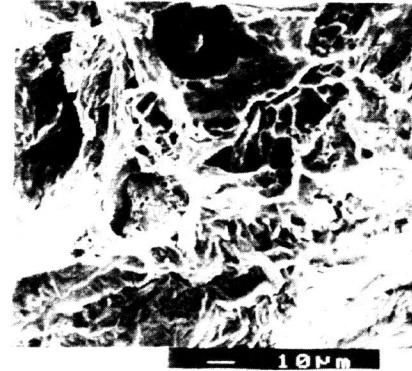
Shear and intergranular fracture in a T4 specimen
